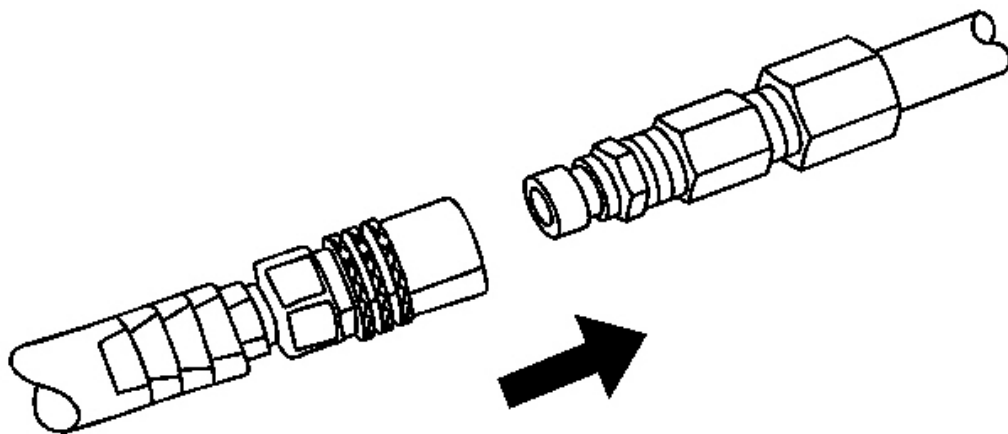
Attaching Extraction Hose To Vacuum Hose
